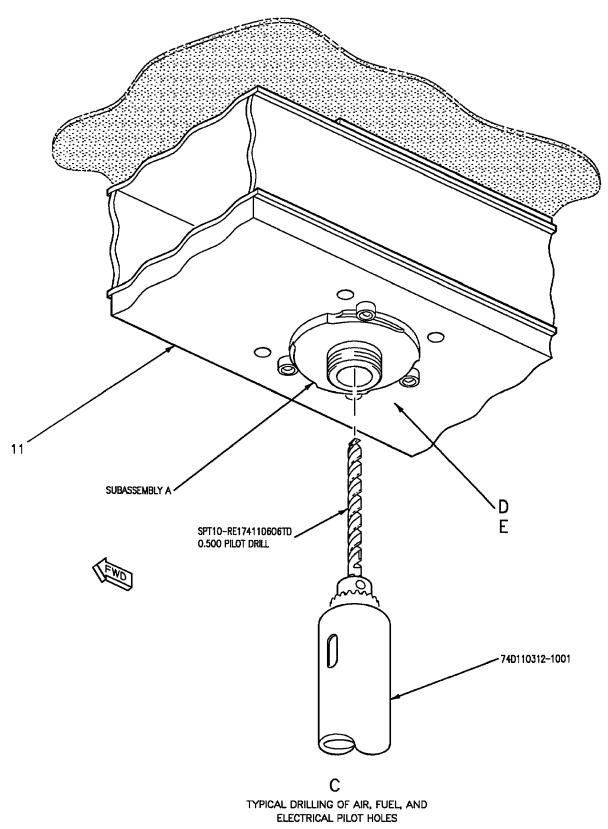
Drilling Holes at Inboard and Outboard Pylon Positions (Sheet 4)
